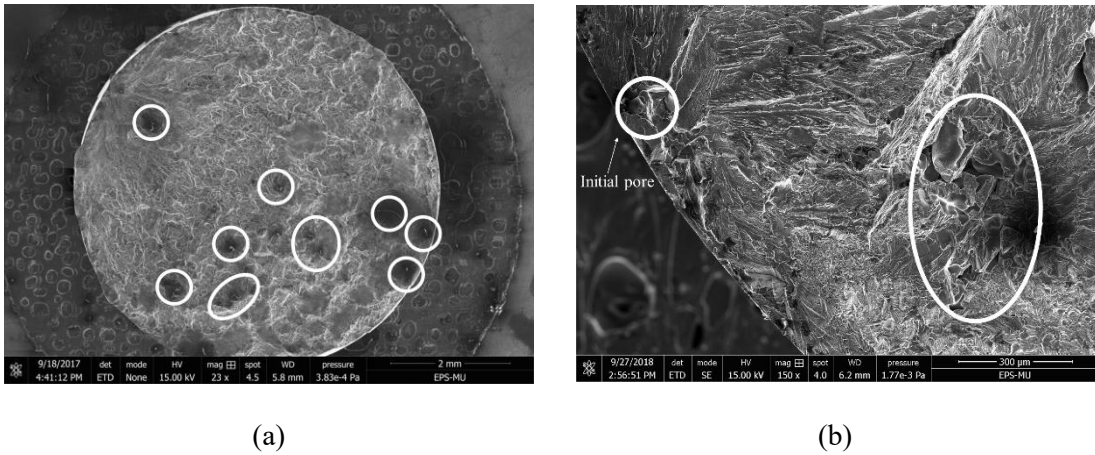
Detailed fracture surfaces in specimens a) C_100_1 and b) C_80_3
